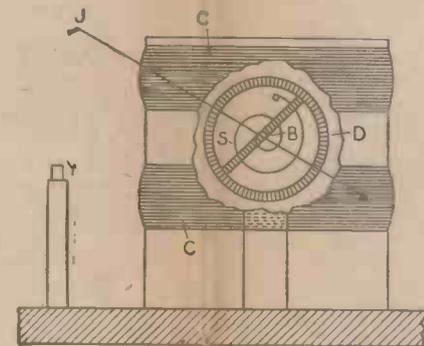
Side View of Tuned Relay with Part of Electro-magnet Broken Away.
